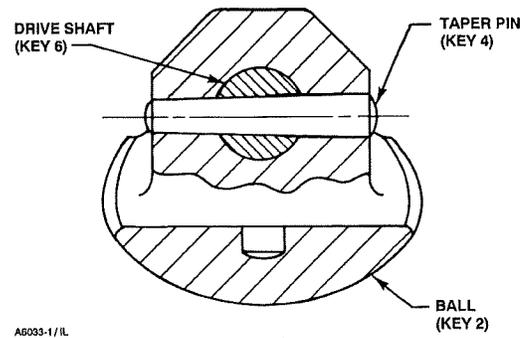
Taper Pin Installation for Design V150, V200, and V300 Sizes 1, 1.5, and 2-Inch Valves.
